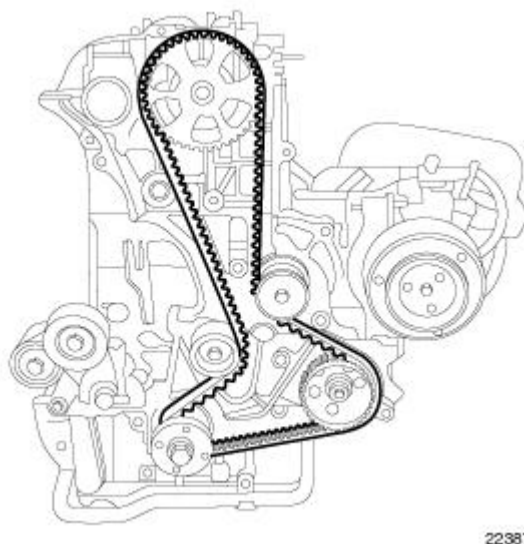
Drive Belt Tensioner And Drive Belt Routing
